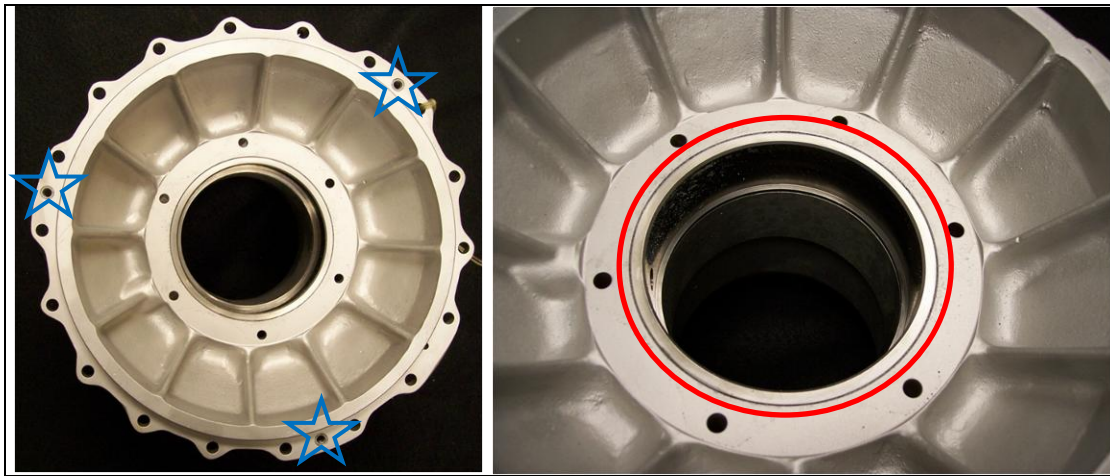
H-64 tail rotor cover contains three helicoil inserts (blue) and one pressed-in bearing liner (red).
